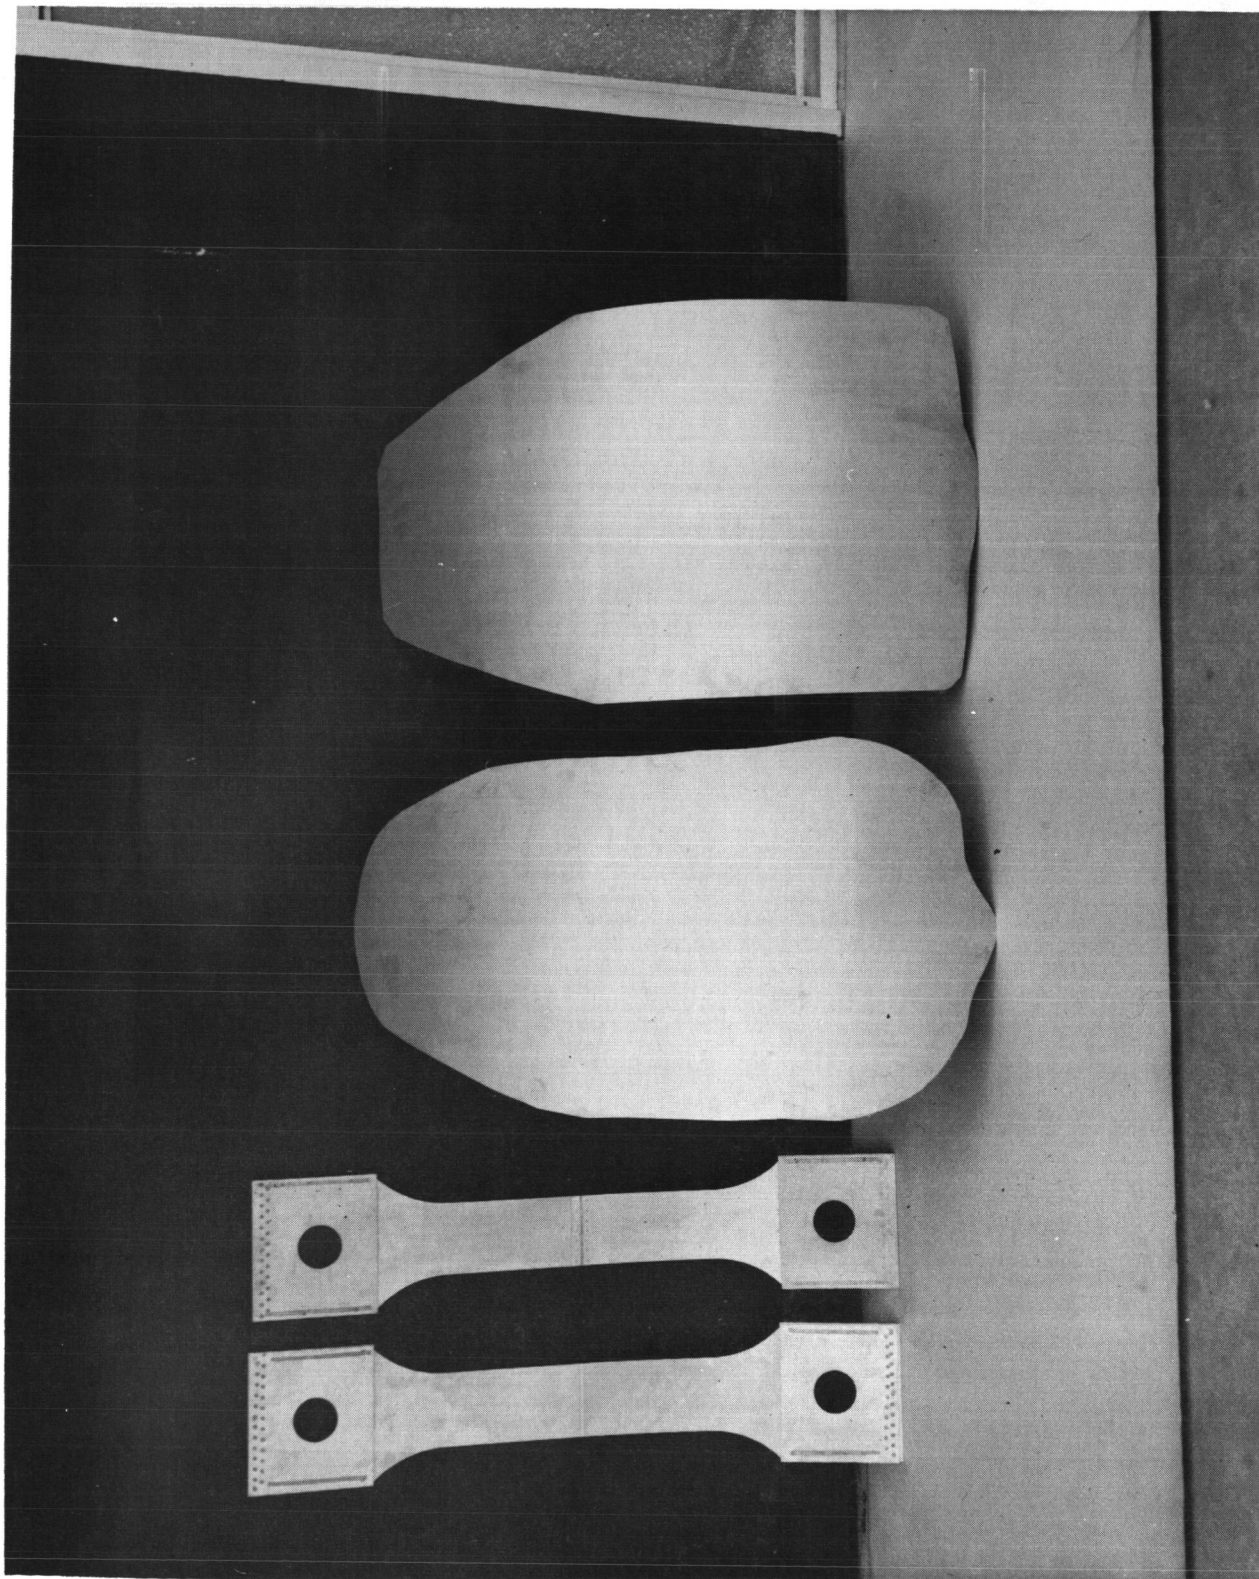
Rough trimmed stretch-formed gores made from 0.025"-0.040" thick commercial quality 5 Al-2.5Sn-Ti alloy sheet. At left are two weld joint fatigue test specimens 4" wide in test area and 36" in length.
